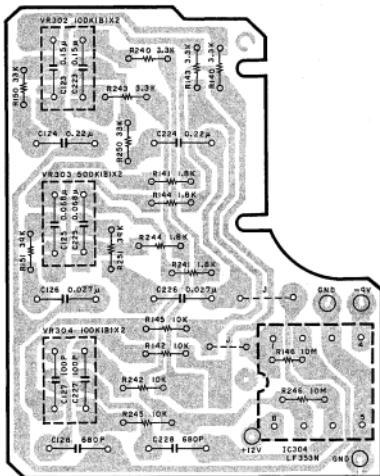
C60503551 - (TD-700 & TD-700E)
